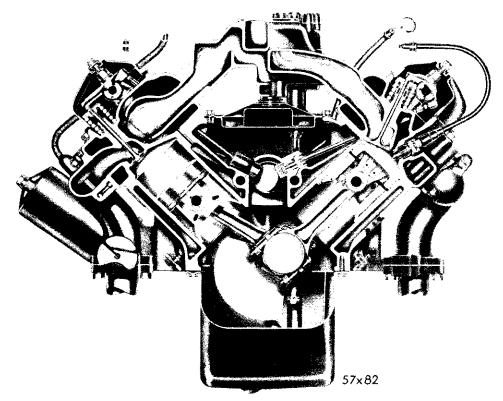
SpitFire V-8 Engine (End Sectional View)
